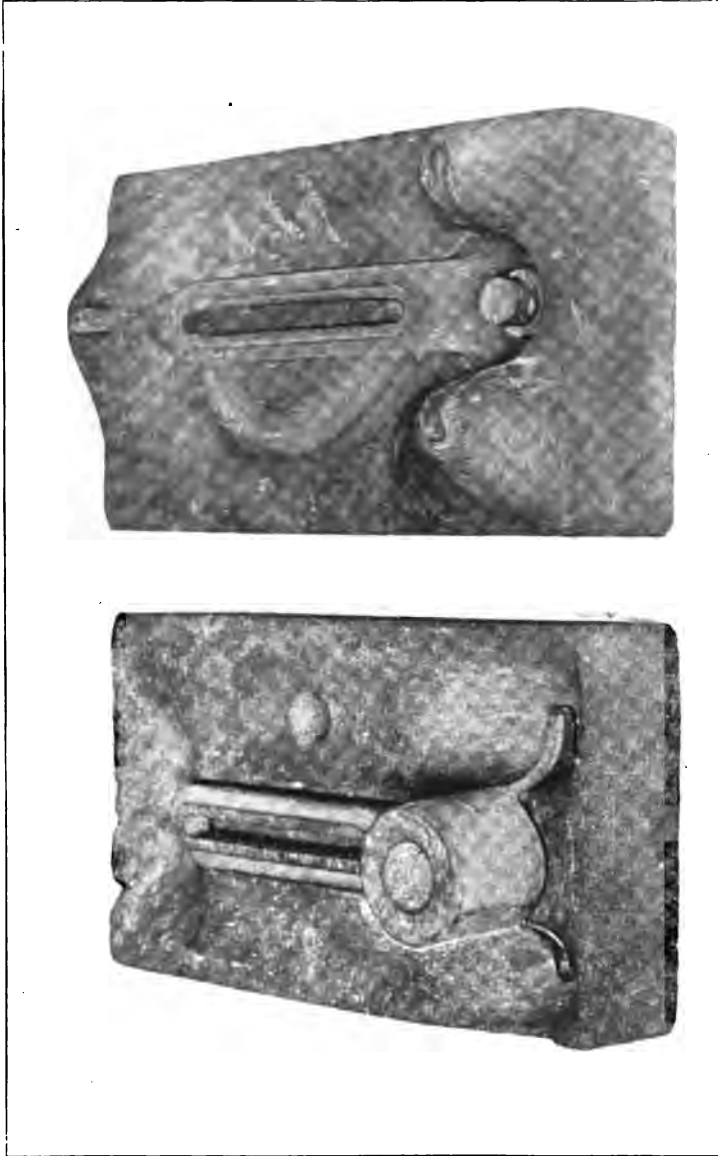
MOLDING AN IRREGULAR SHAPED PATTERN.
